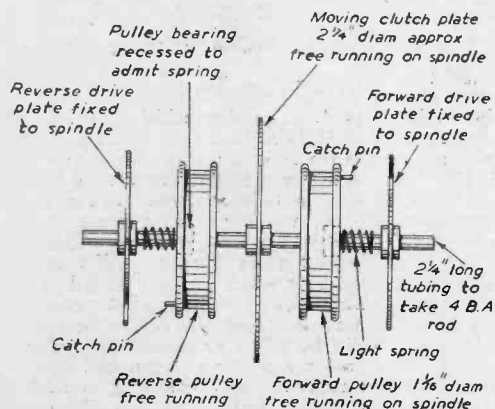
Detailed layout of part of the clutch mechanism. (Parts are spaced for clarity.)
